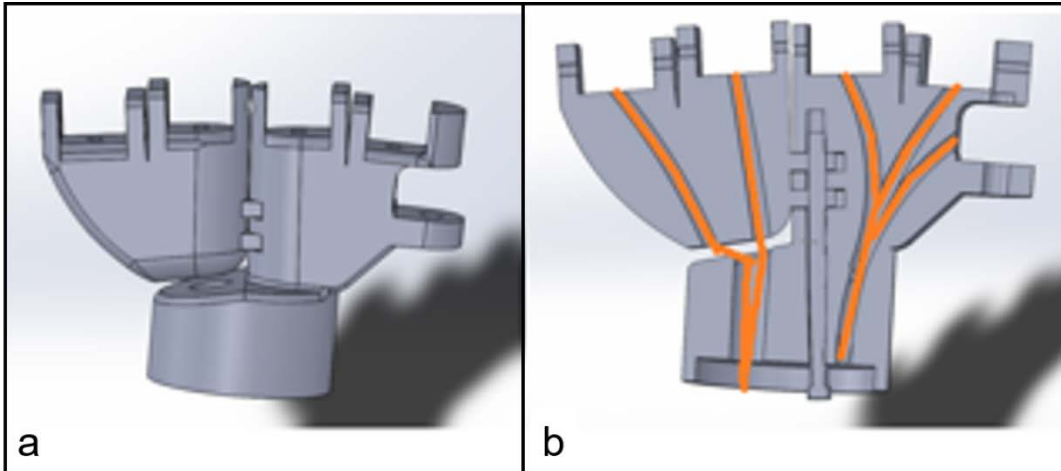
(a) Wrist assembly (b) Section view showing tendon route
